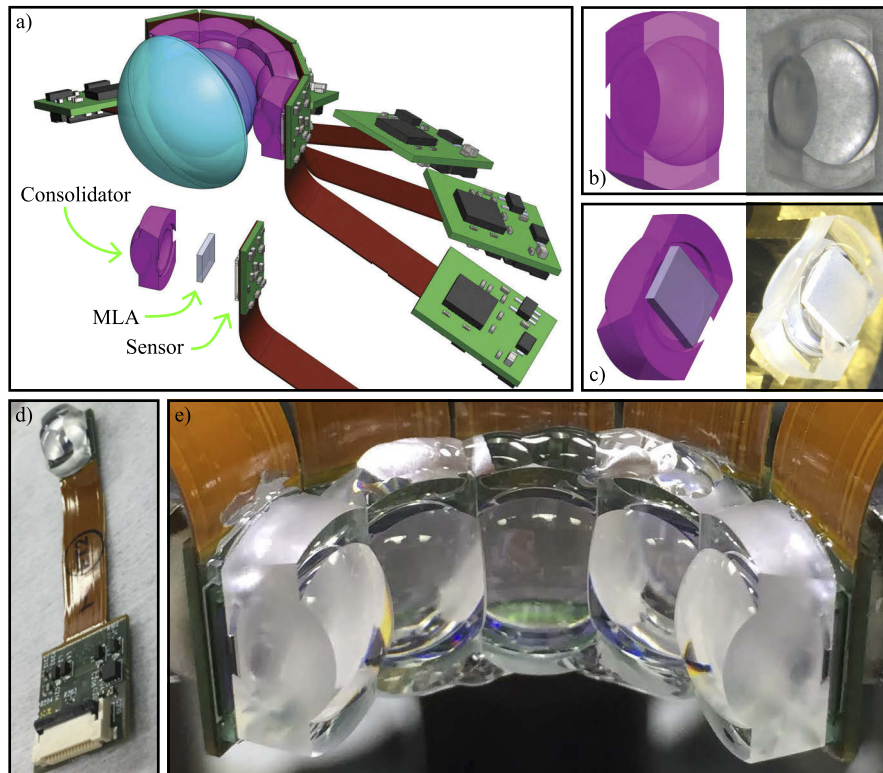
(a) CAD assembly of the five sensor array behind a monocentric lens with an exploded sensor stack to the lower left. (b) CAD and fabricated consolidator after wedge cut and with microlens array attached (c). Final assembled consolidating LF image sensor on flex (g) and after assembly into the full panoramic array (e).
